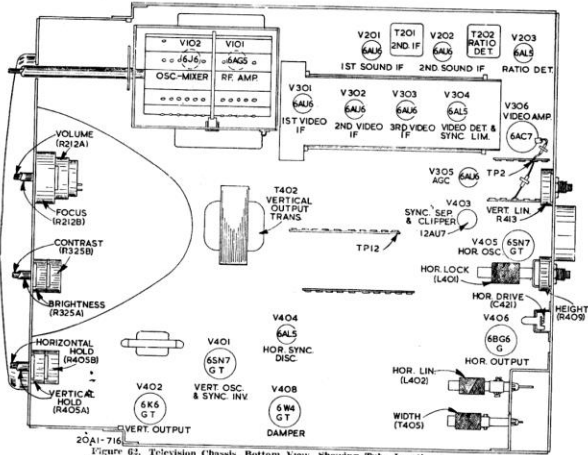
Television Chassis, Bottom View, Showing Tube Locations.
